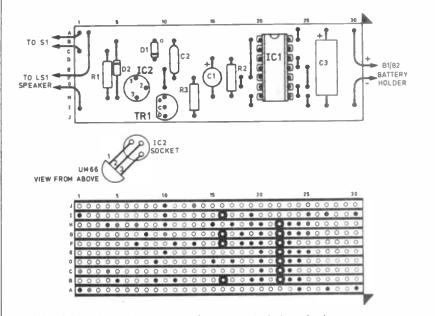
Stripboard component layout, melody i.c. pinning arrangement and details of breaks required in the underside copper tracks.
